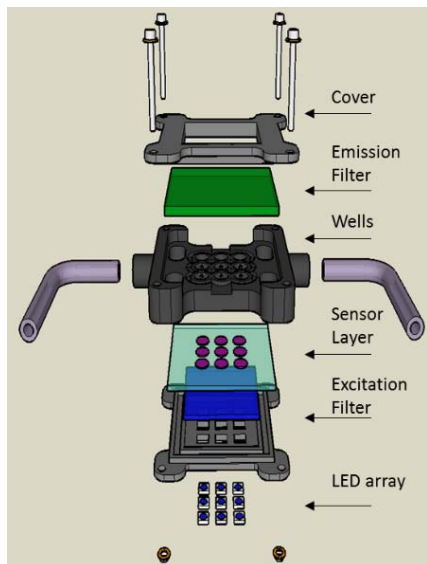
CAD design of prototype 3x3 well sensor array (exploded view)
